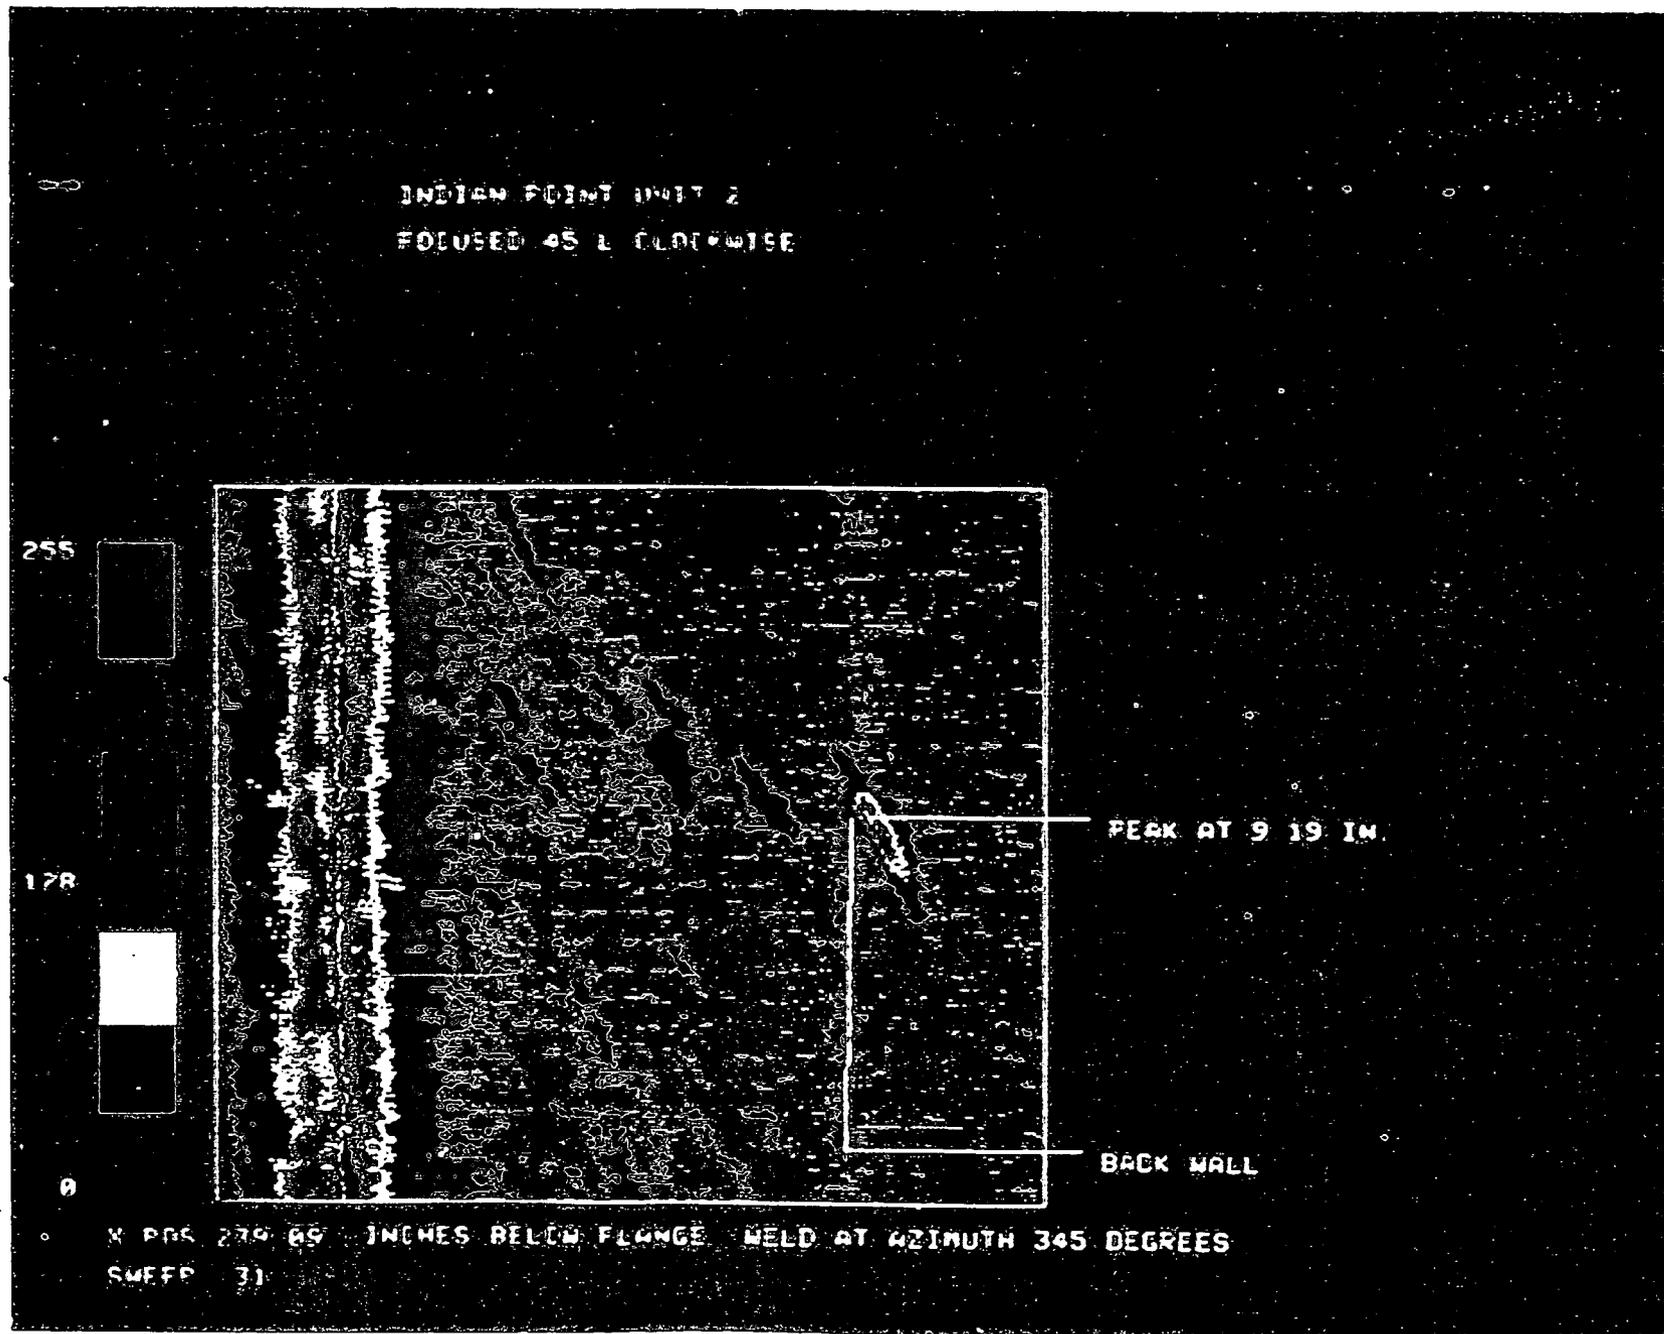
Indian Point Unit 2, Weld 12, Focused 45°L CW
